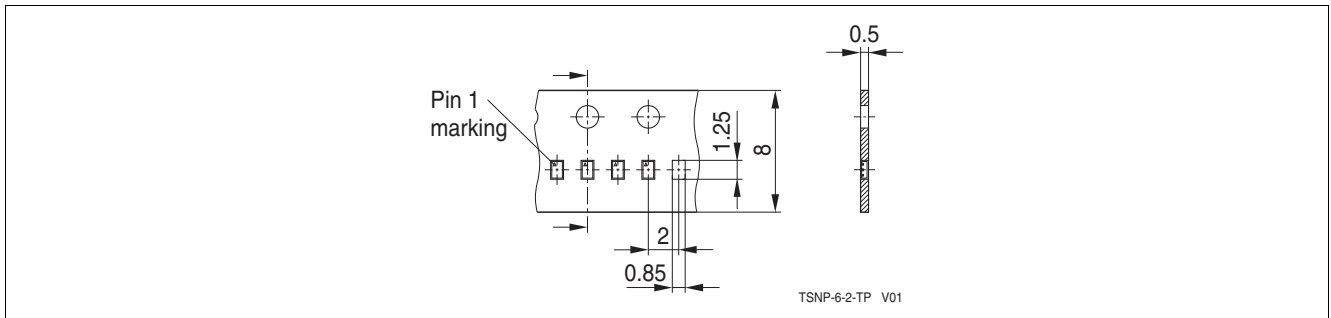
Tape & Reel Dimensions (reel diameter 180 mm, pieces/reel 15000)
